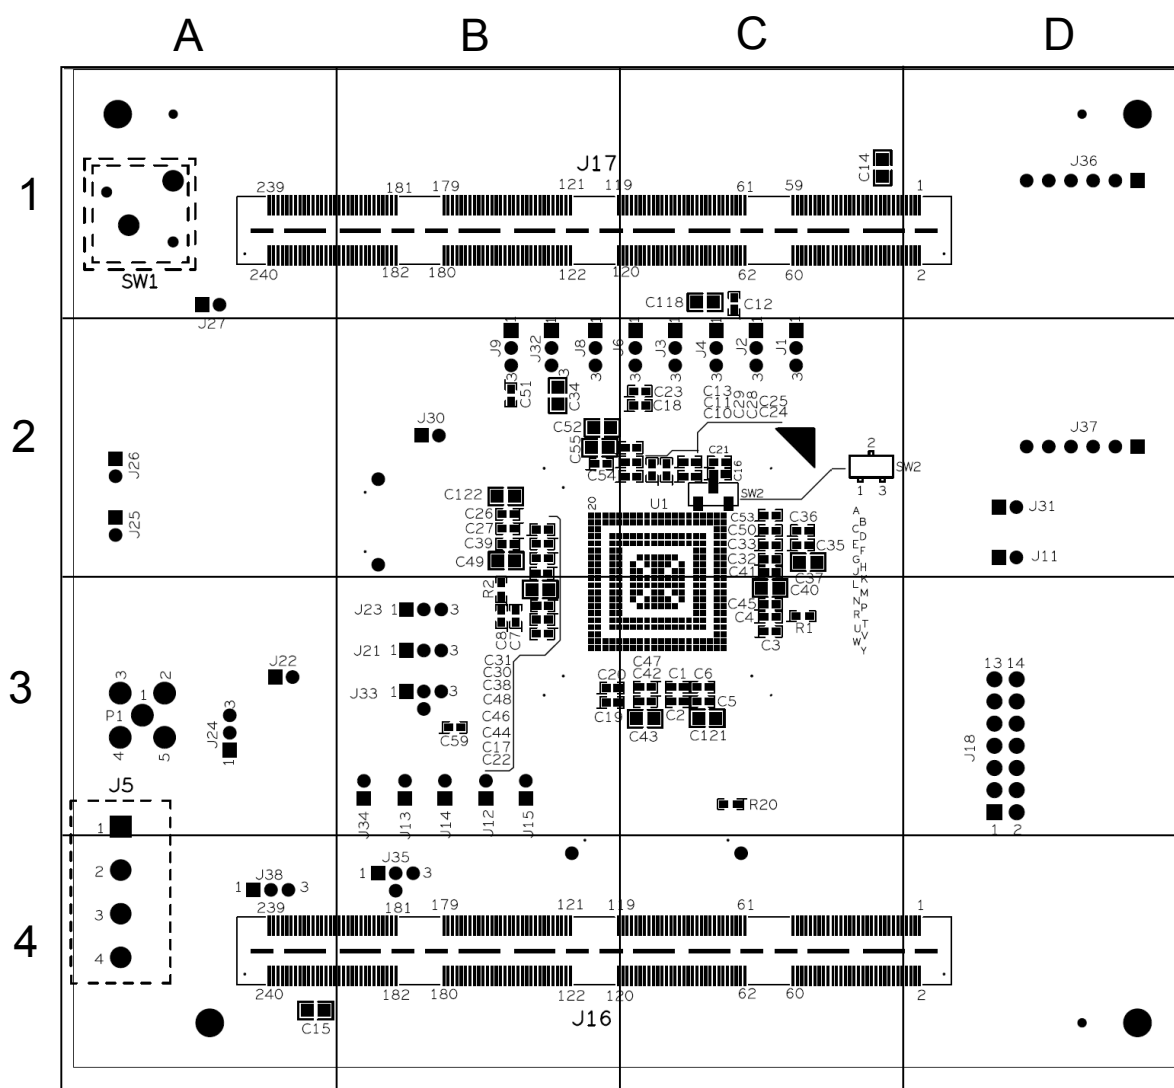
SPC58XXADPT292S Rev. C bottom "mini module" view
